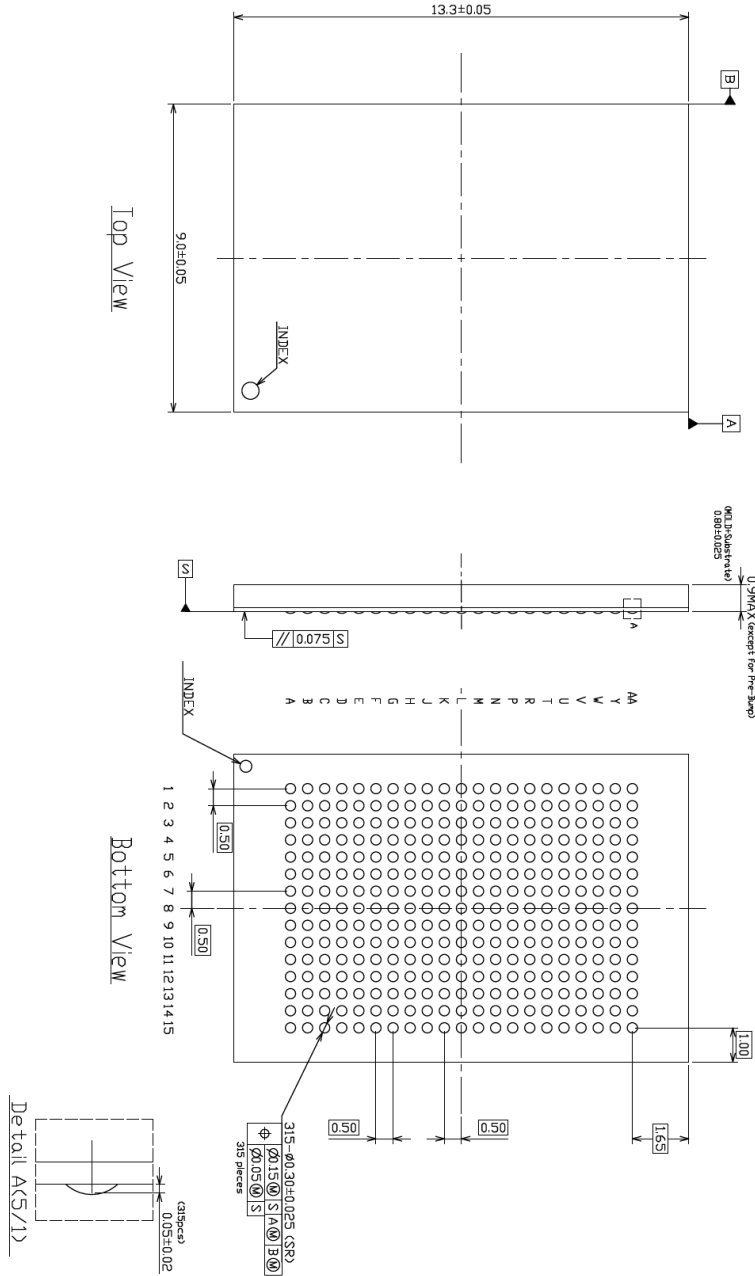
Package Dimension of P-VFLGA315-0914-0.50-001
